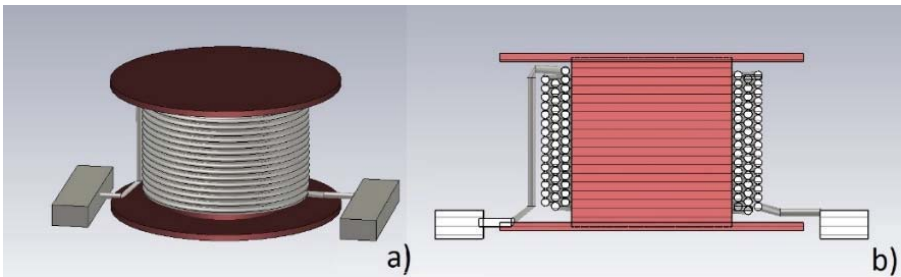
3D model of surface assembly component WE 744066151: a) 3D model of a component without an external core; b) cross-section of the 3D model without an external core.
